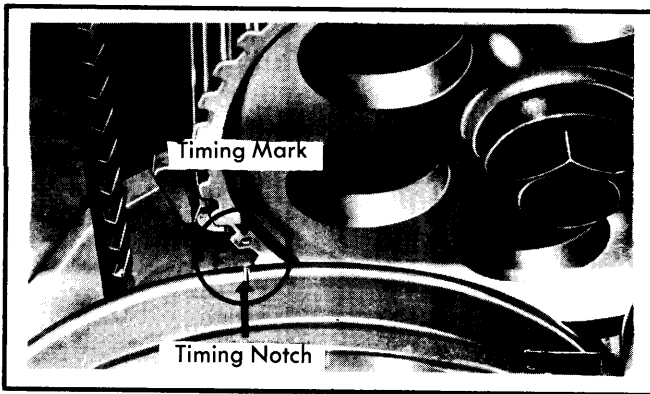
Intermediate Shaft Sprocket Aligned with TDC Mark on Crankshaft Pulley
